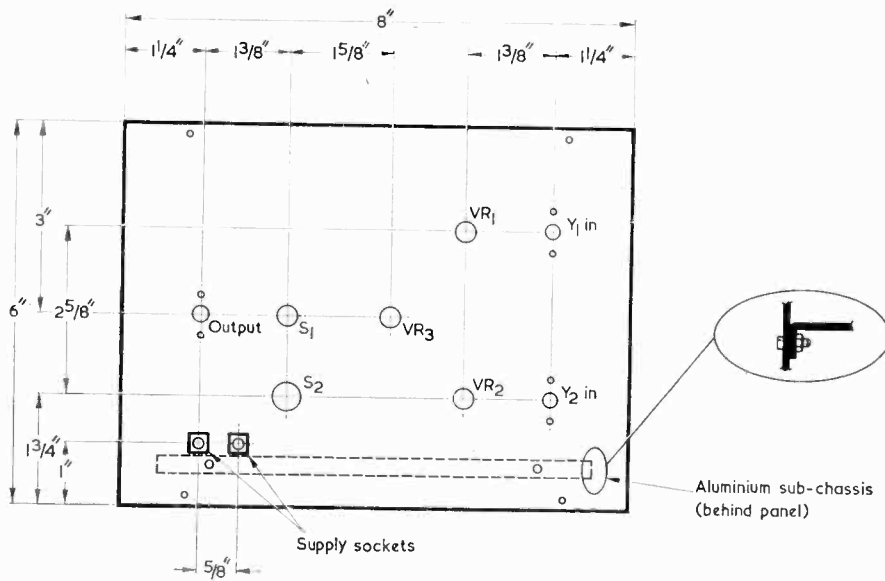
Drilling dimensions and component layout for the front panel. A side view showing the method of securing the sub-chassis is given in the inset
